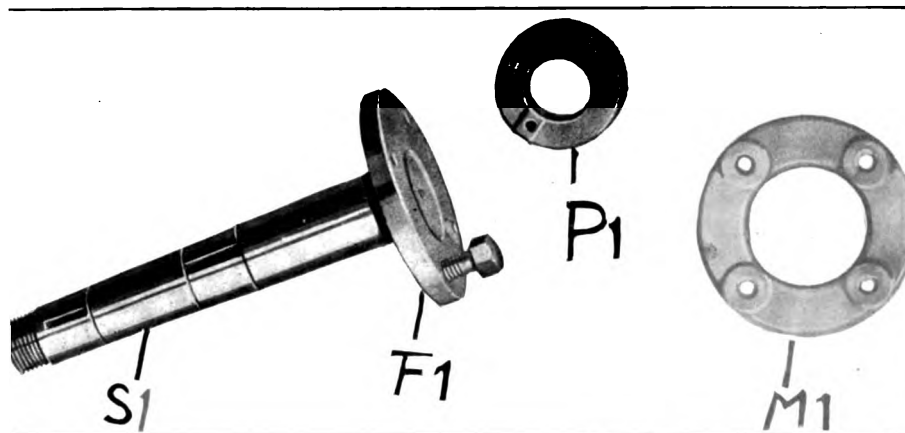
A very nice detail of the universal magneto drive in the Model M Thomas motor
